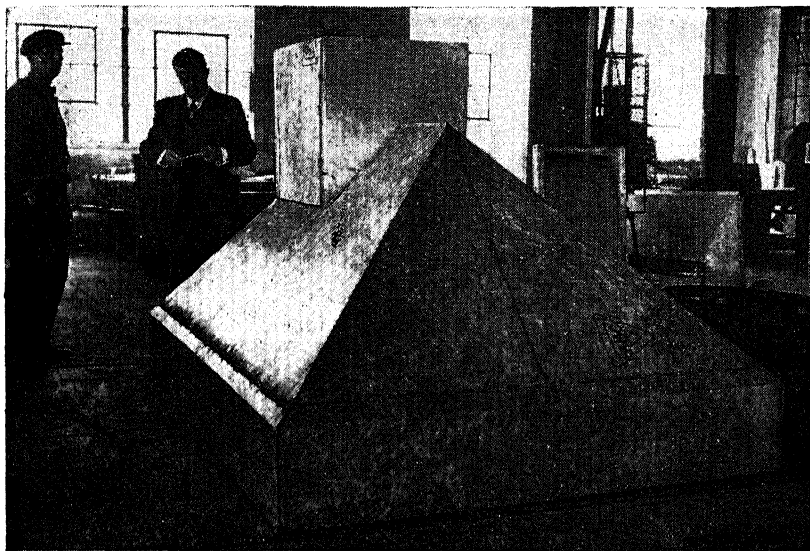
Hopper built from 20-gauge galvanized iron welded by carbon arc process with copper alloy feeder rod. Inside is reinforced by $1\frac{1}{2}$ -in. angle iron.
